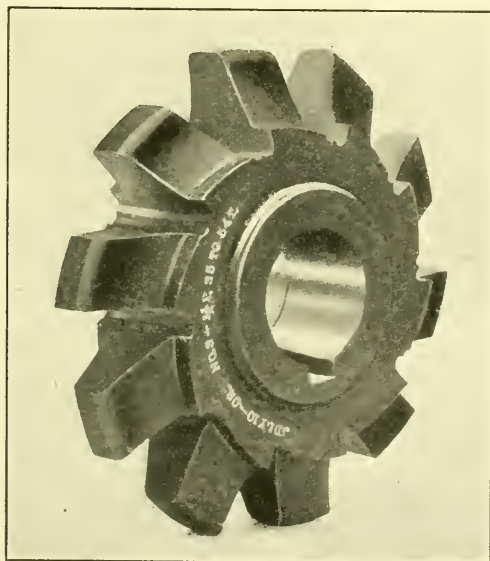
PERSPECTIVE VIEW OF THE CUTTER
